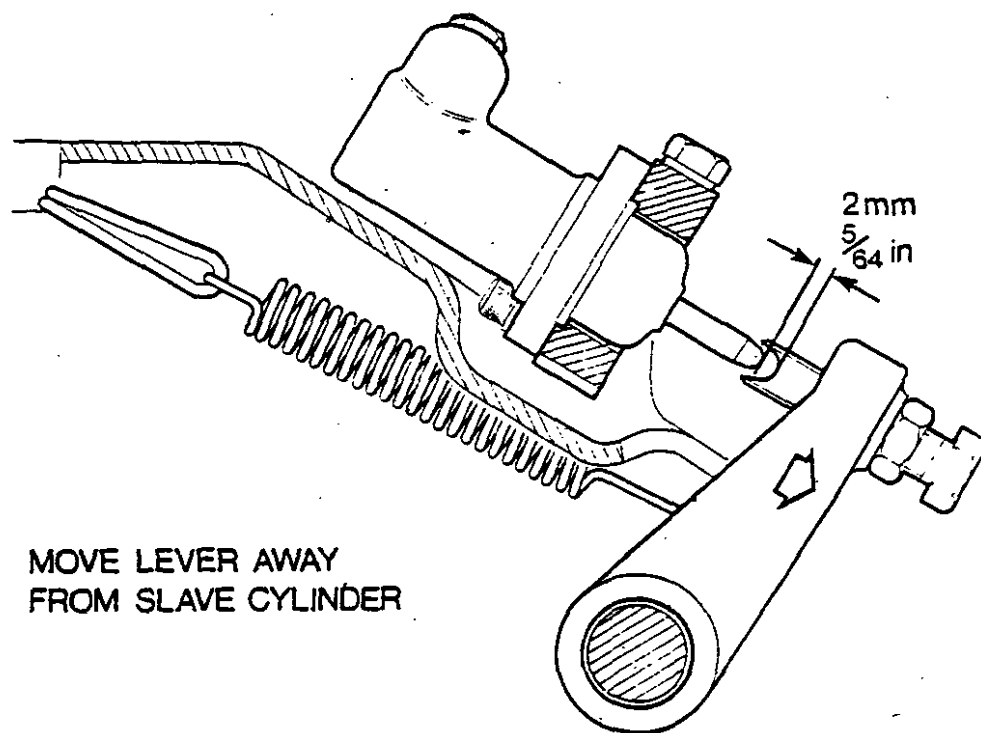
885 CLUTCH SLAVE CYLINDER
